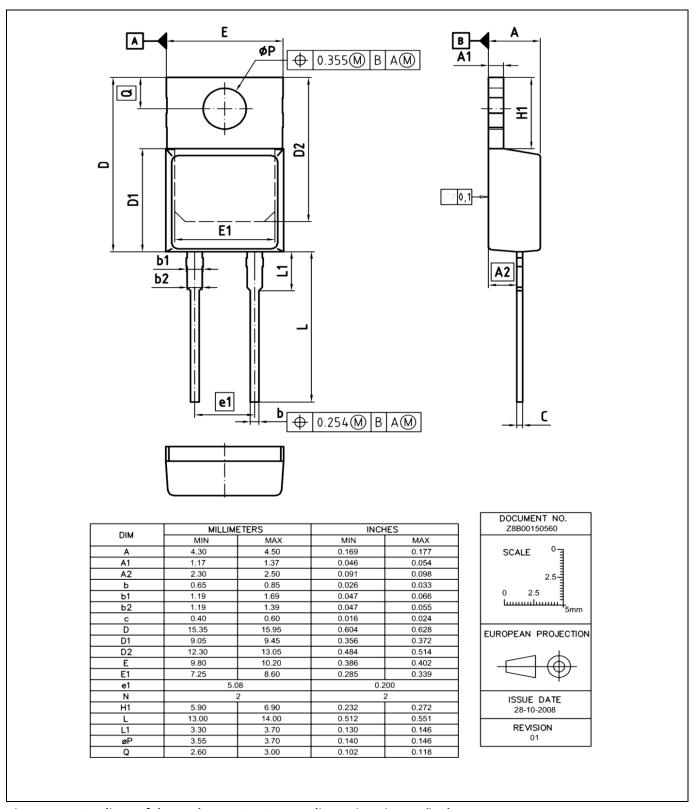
Outlines of the package PG-TO220-2, dimensions in mm/inches
